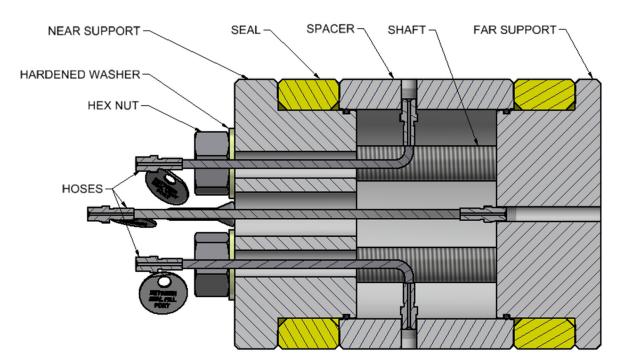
Double Block and Bleed Isolation Plug 8" Plug Components
